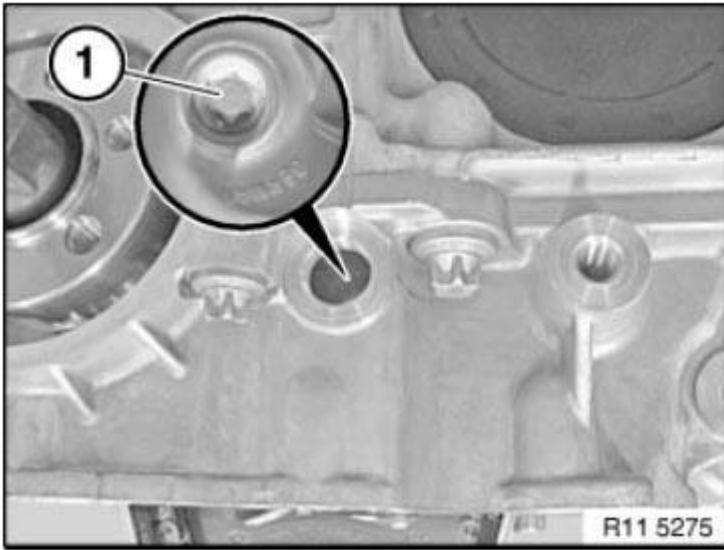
Identifying Oil Pump Triangular Drive Mounting Screw
